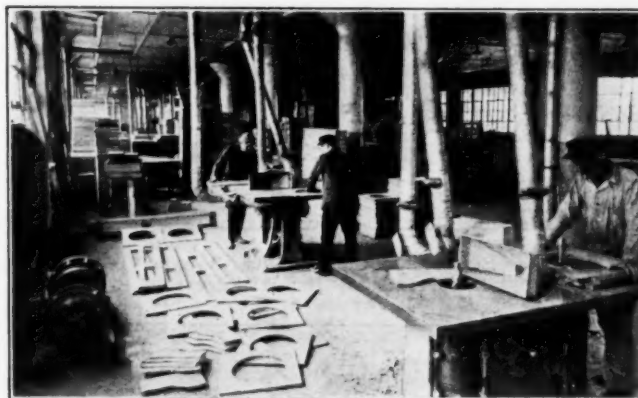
DIRECT-MOTOR-DRIVEN DOUBLE-SPINDLE SHAPERS WITH FREQUENCY CHANGER IN BACKGROUND
